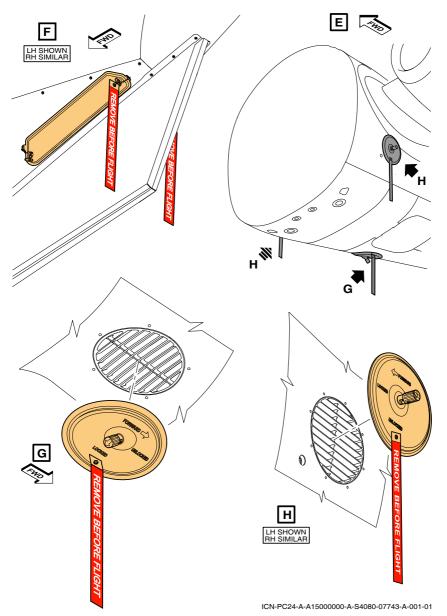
Parking - Lower Rear Fuselage Covers
